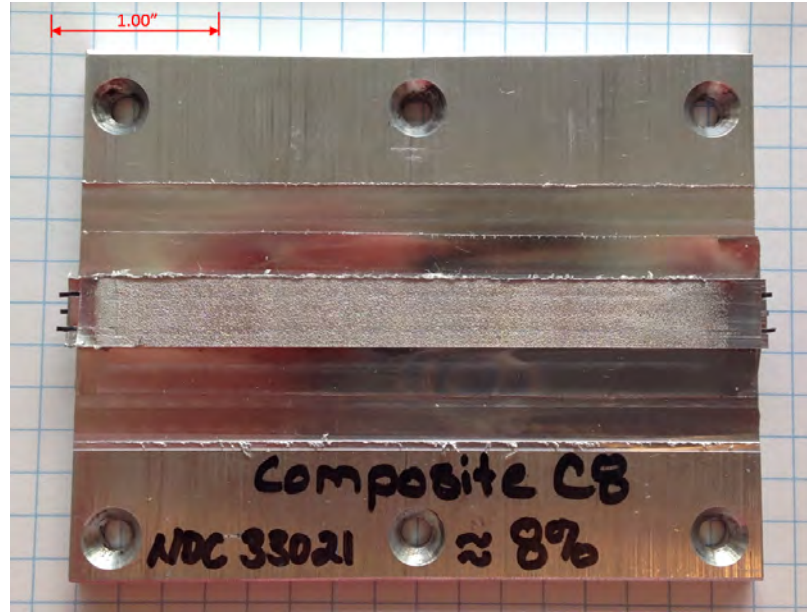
Coupon size sample following CNC milling operations within the UAM machine to mill the component to the proper width.
